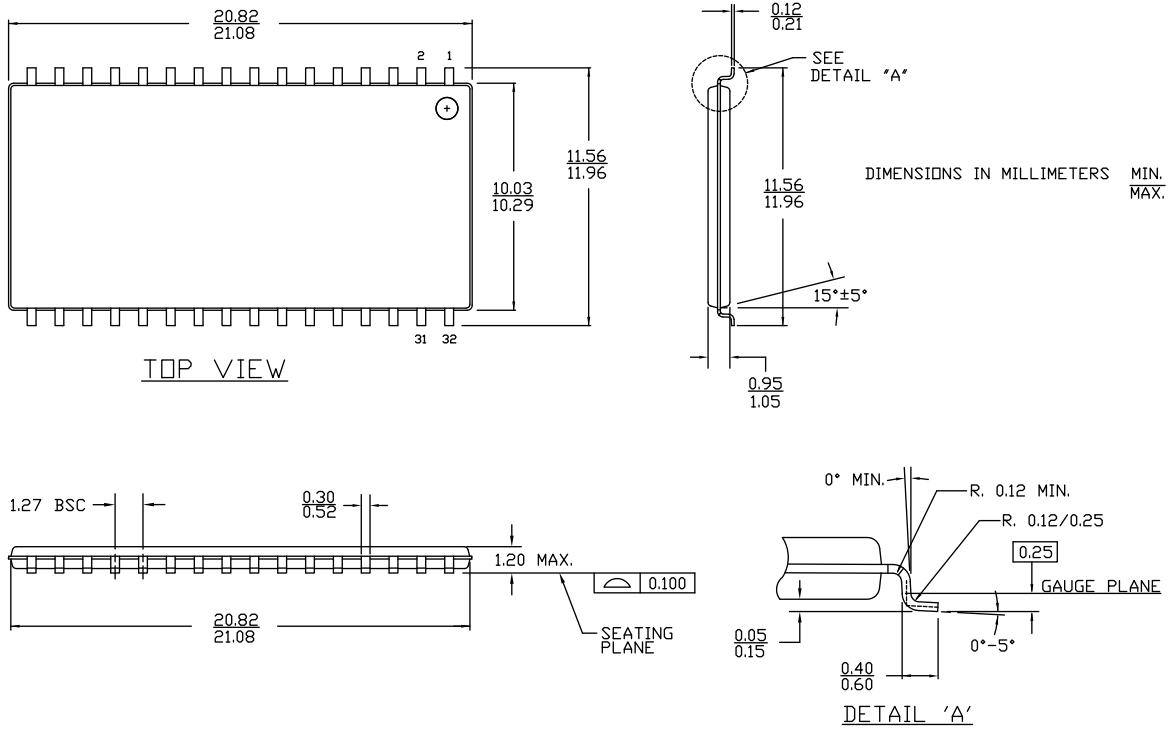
32-pin SOJ (400 Mils) V32.4 (Molded SOJ V33) Package Outline, 51-85033
